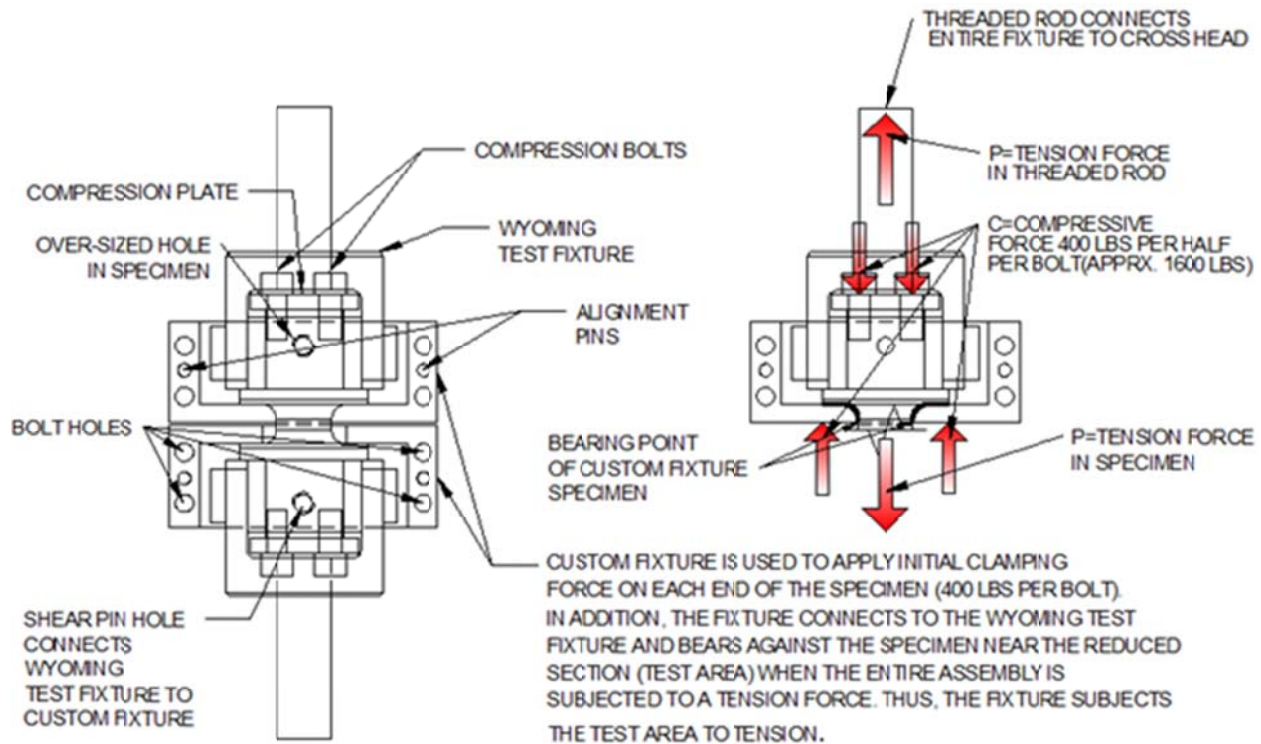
Elevation of (a) Section of Bottom Half of Fixture and (b) Halves Connected
